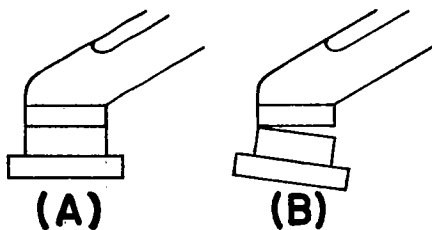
(A) proper alignment of breaker points. (B) improper alignment causes burning and pitting.
